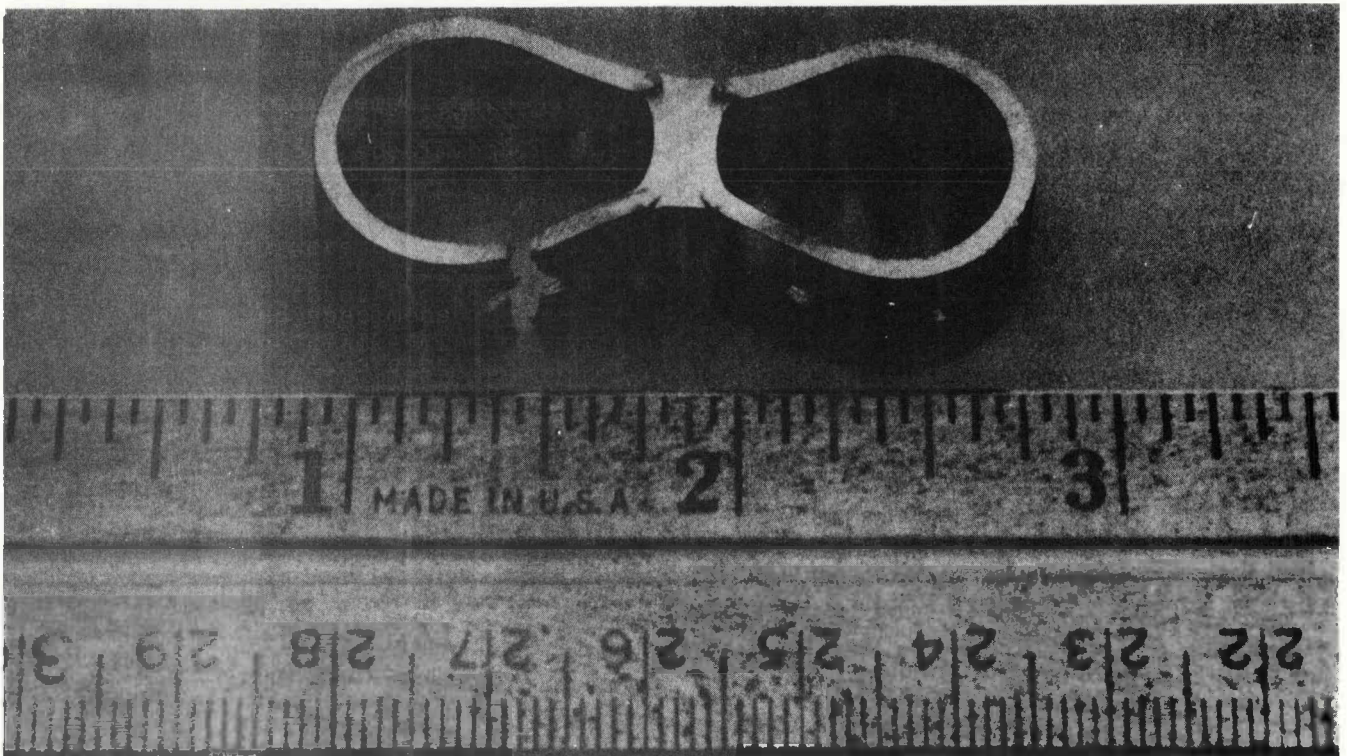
Brazed Joint with Hourglass Shaped Filler Strip After Tensile Test, Showing Tube Deformation Before Failure
